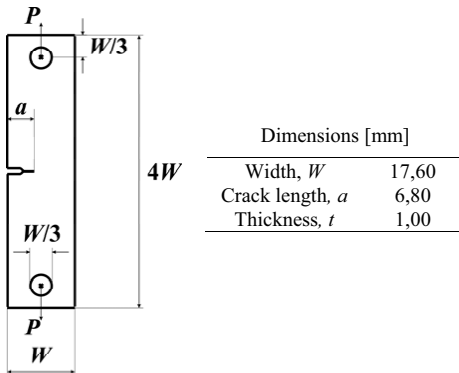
SEC specimen geometry and dimensions (in millimeters).
